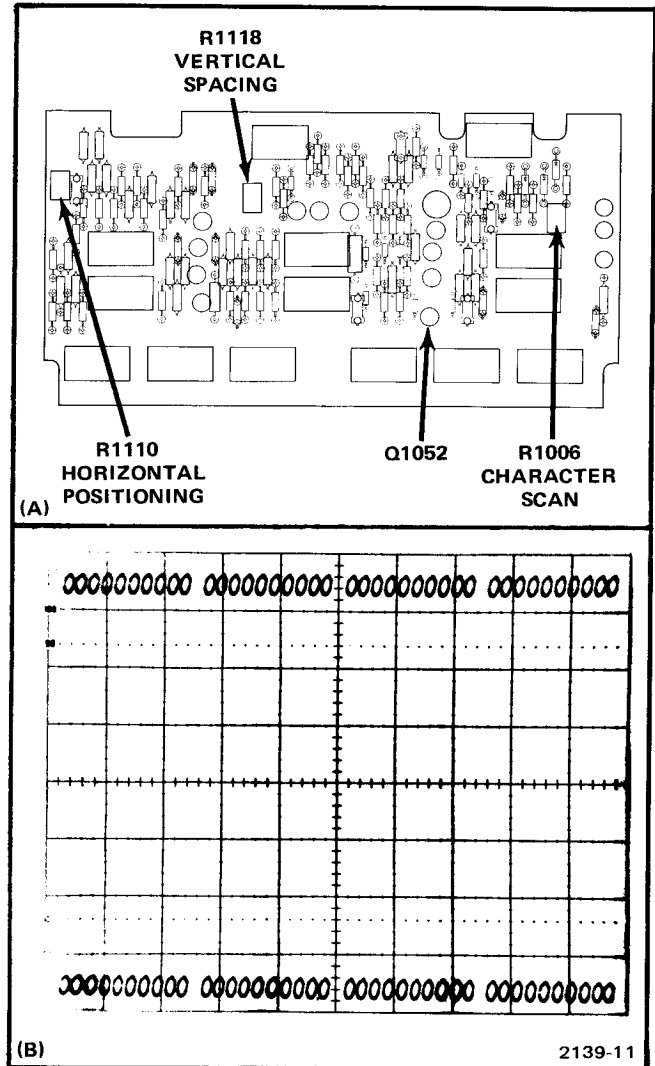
(A) Locations of Readout Adjustment, Q1052, (B) Readout display with Q1052 removed (with plug-ins removed).
